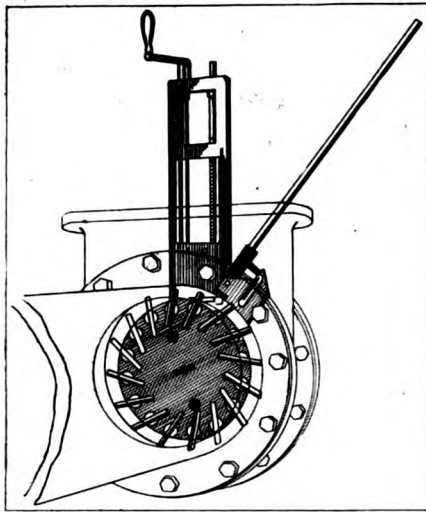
GATE VALVE REFACING MACHINE IN PLACE
